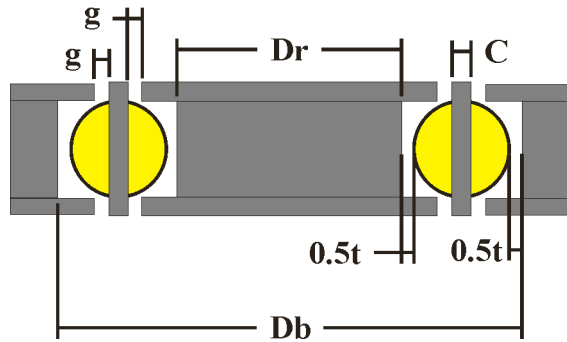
Depiction of the bearing design parameters: g - cage release gap (40 μ m), C - cage width (100 μ m), t - raceway tolerance (10 μ m), Dr - rotor diameter (1.18mm), Db - bearing raceway diameter (2.2mm).
